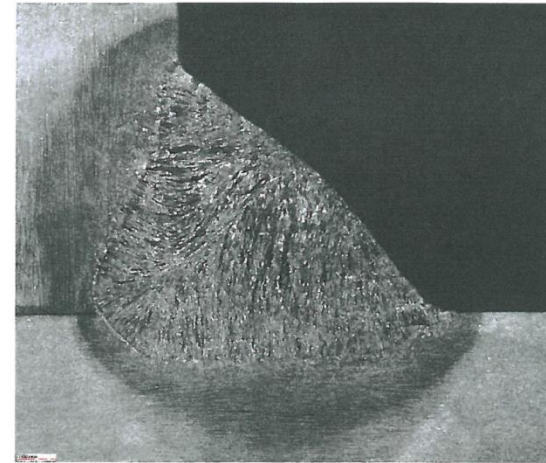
General view of metallographic section 33_MG1 perpendicular to the weld axis
